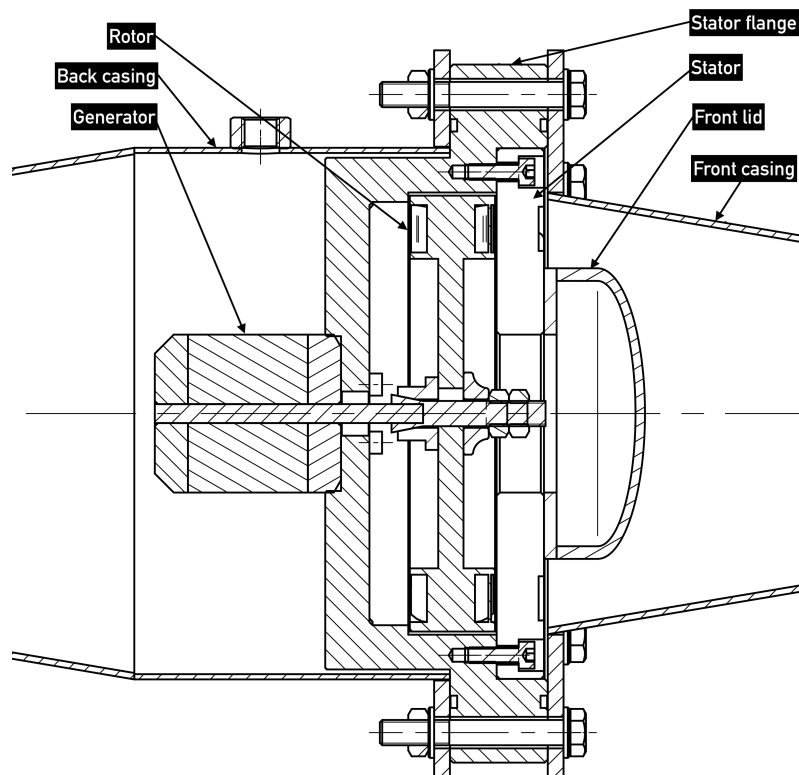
Part of the turbine assembly (by Ing. Suchna)
